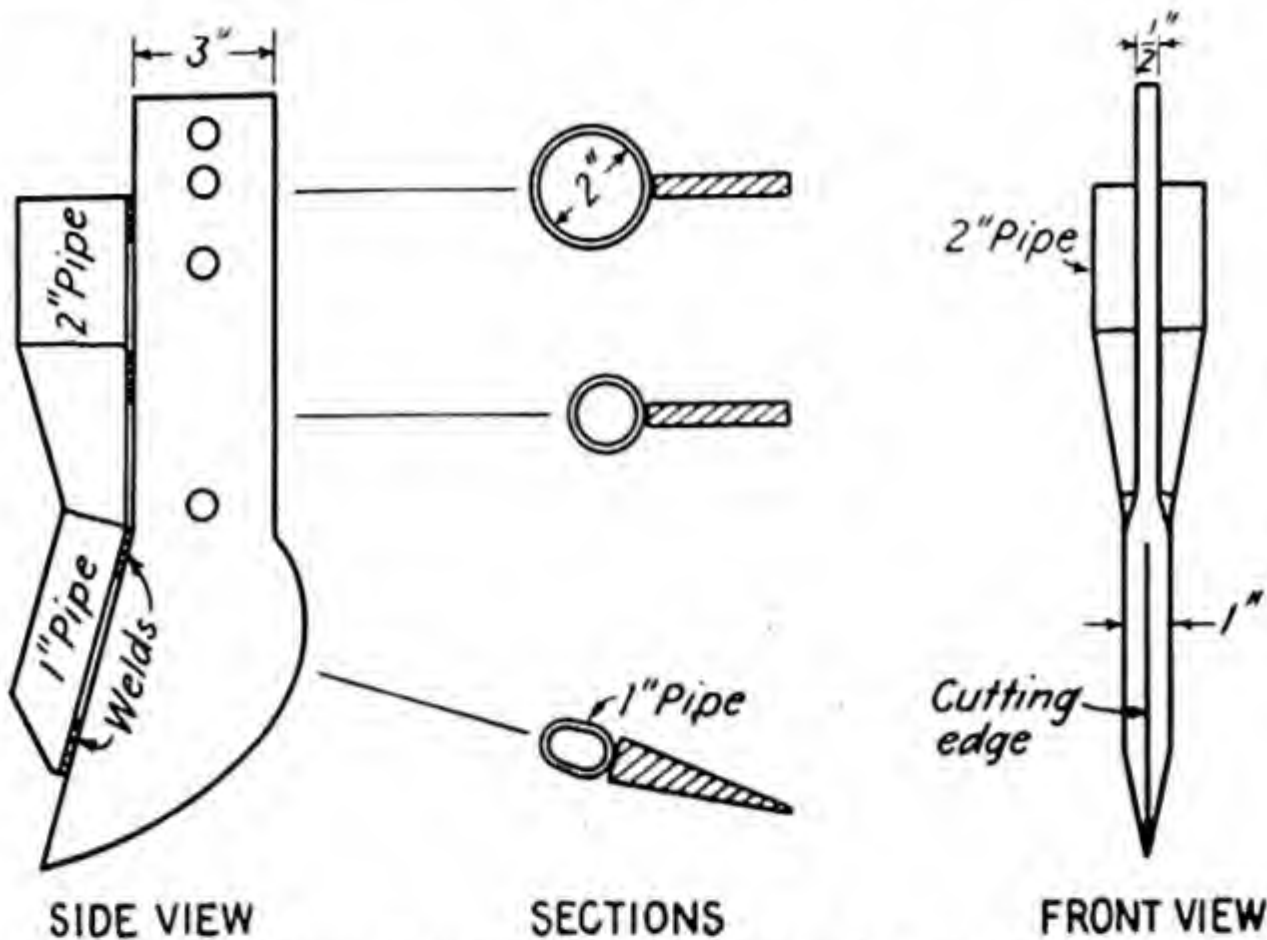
Knife to cut through sod and make furrow for fertilizer flowing through pipe behind the knife. (Courtesy of M. R. Bentley.)
